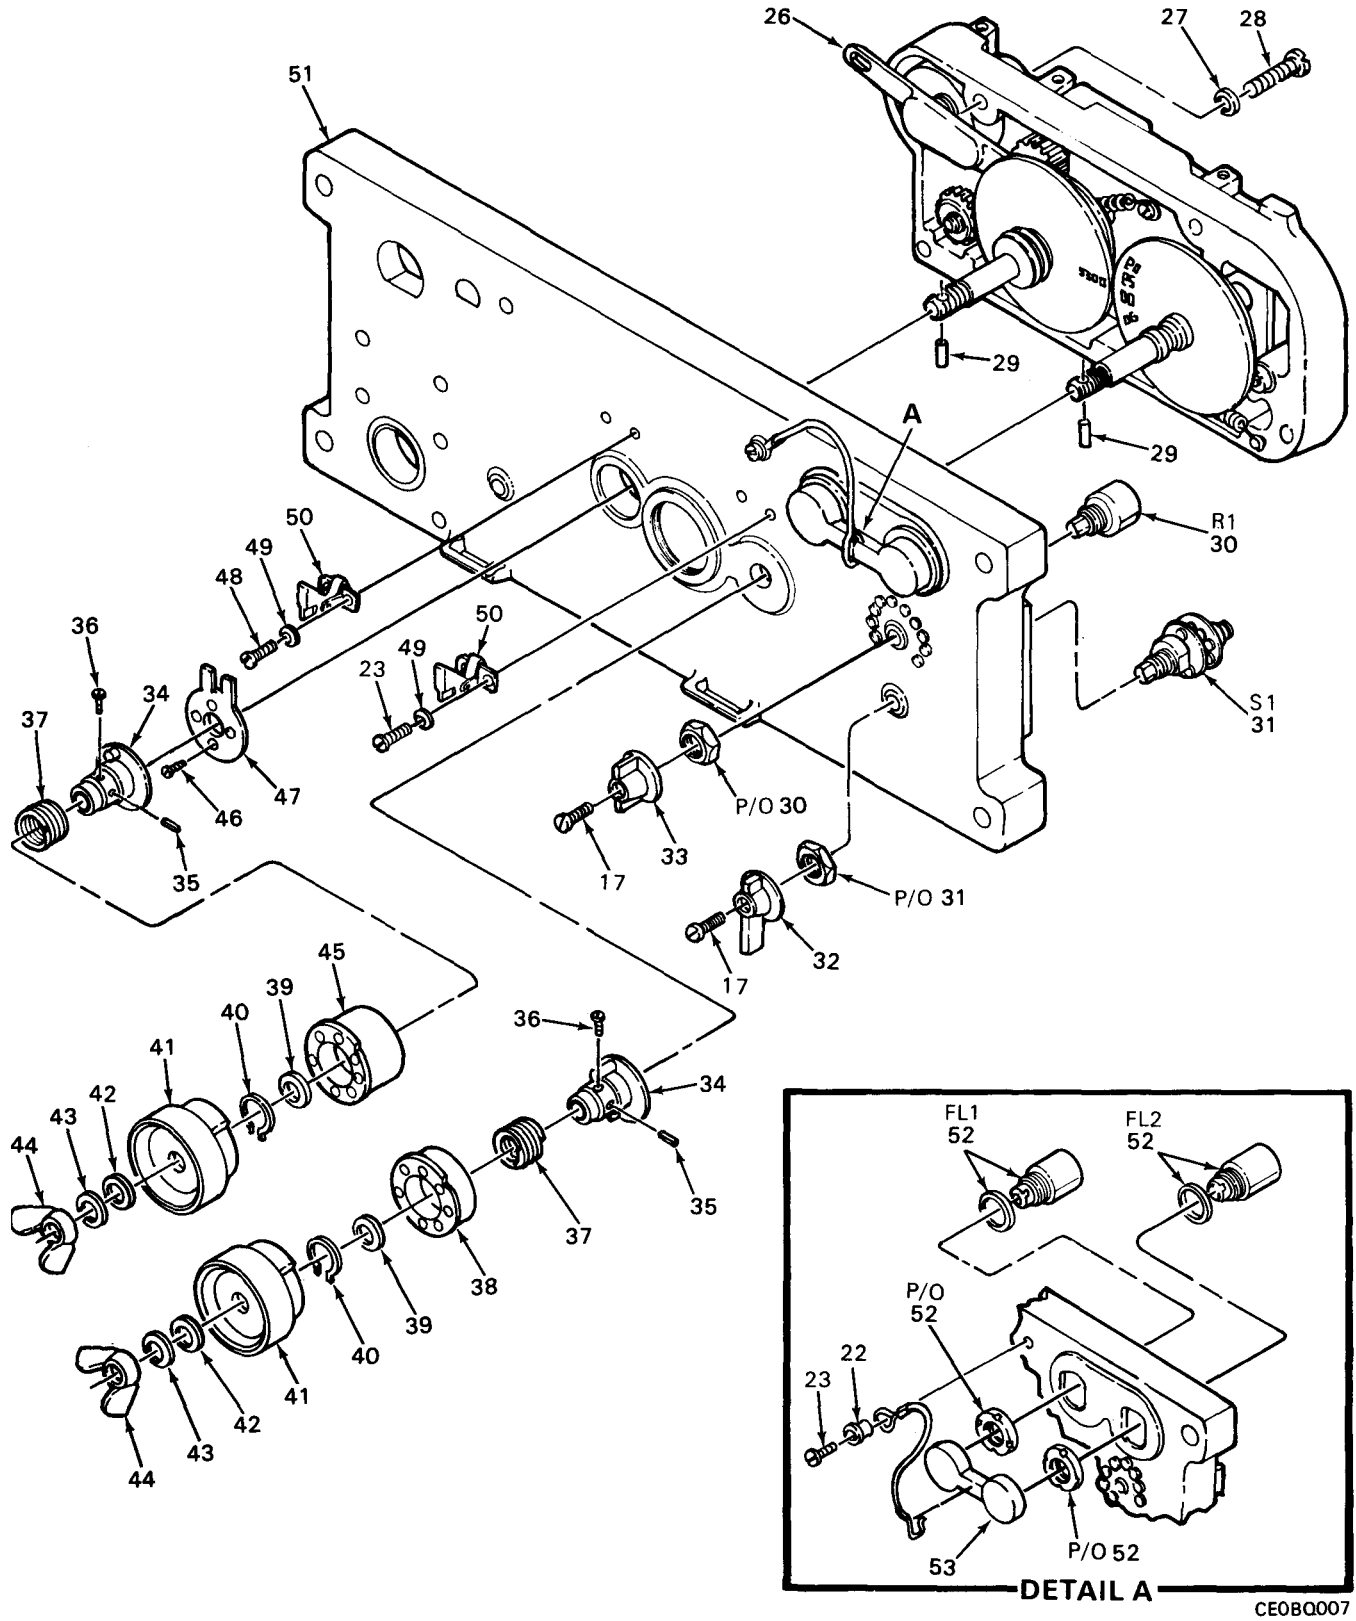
Front Panel Assembly A30 (Sheet 1 of 2)
